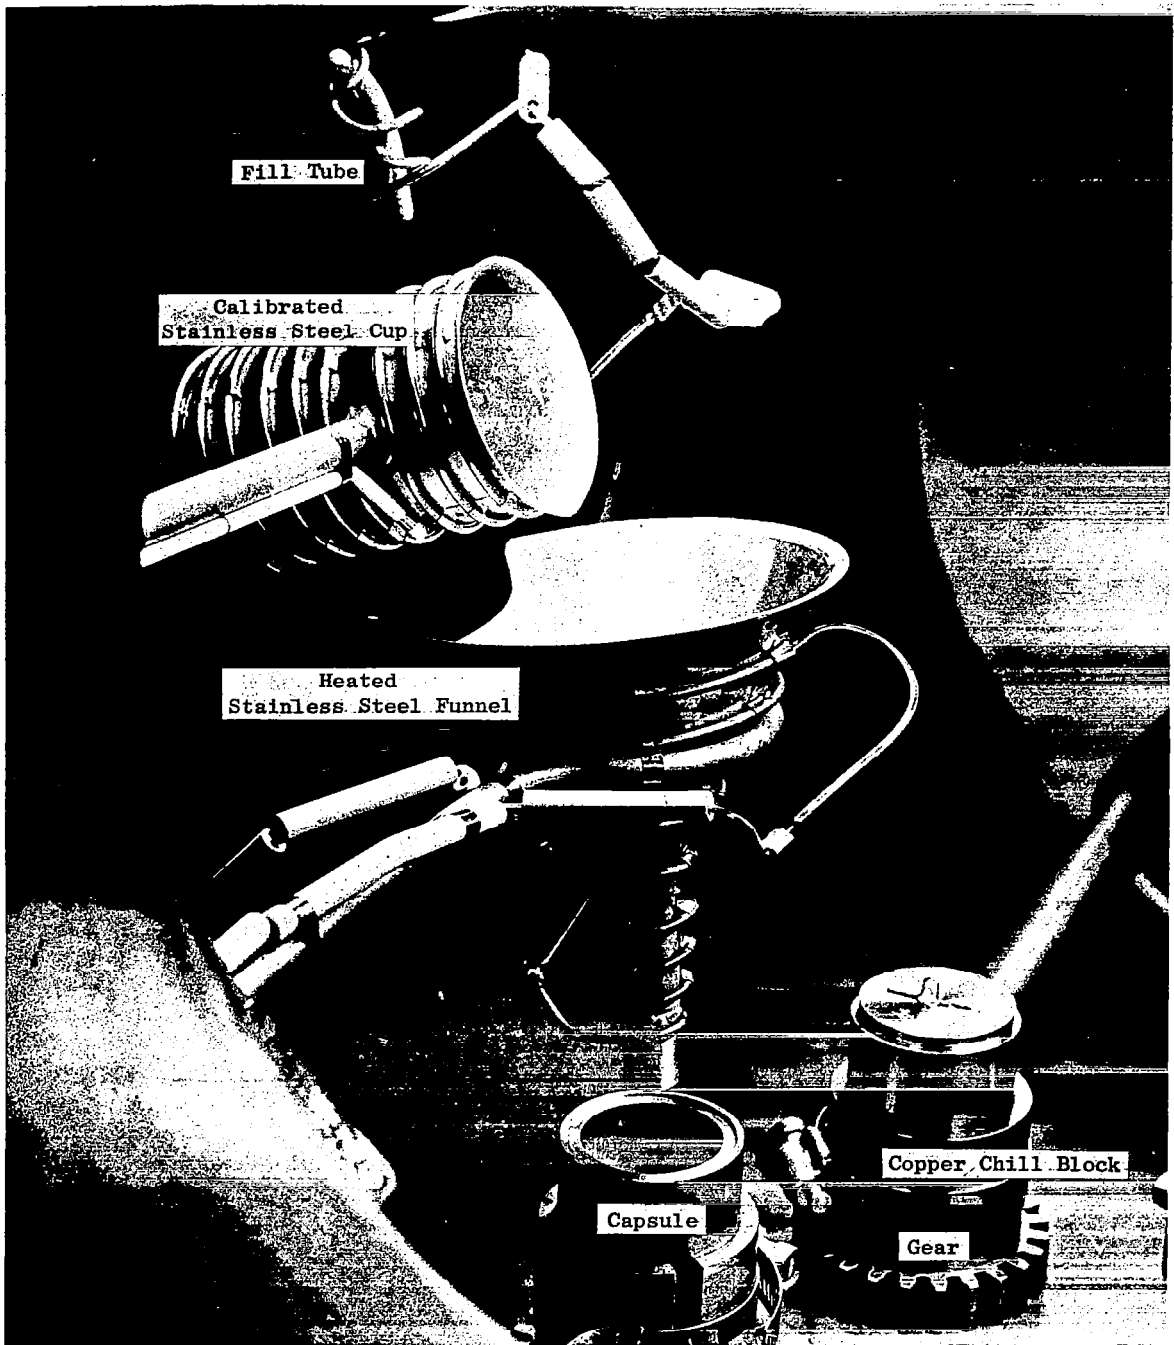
Internal Arrangement of Facility for Filling Corrosion Capsules with Potassium as Viewed Through Sight Port of Electron Beam Welding Chamber.
